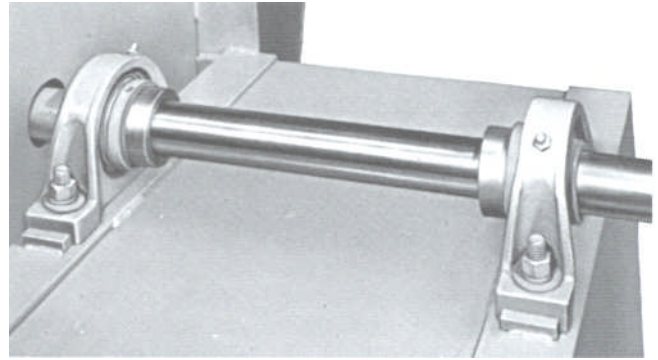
Bearing Stop Blocks/Shaft Set Collars
